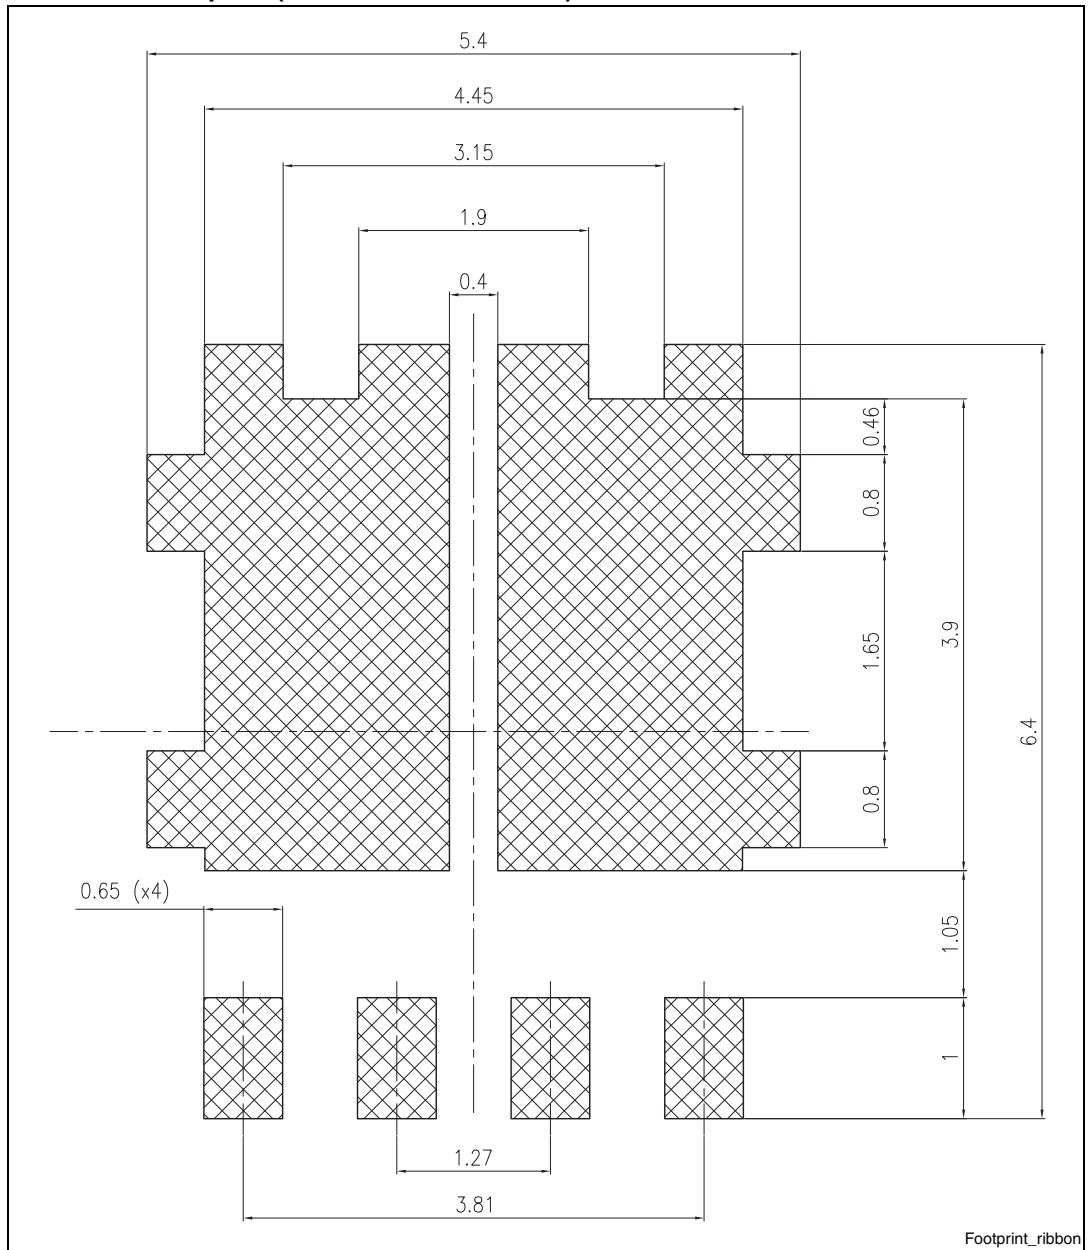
PowerFLAT™ 5x6 - 8 leads dual pad (ribbon) drawing recommended footprint (dimensions are in mm)
